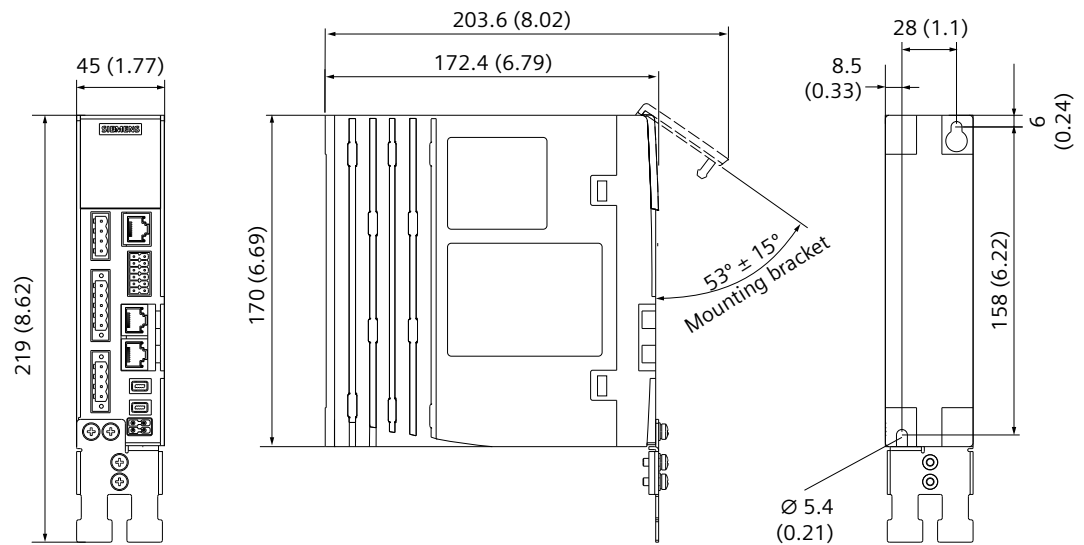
Dimension drawing SINAMICS S210 FSA, 1 AC, dimensions in mm (inch)
